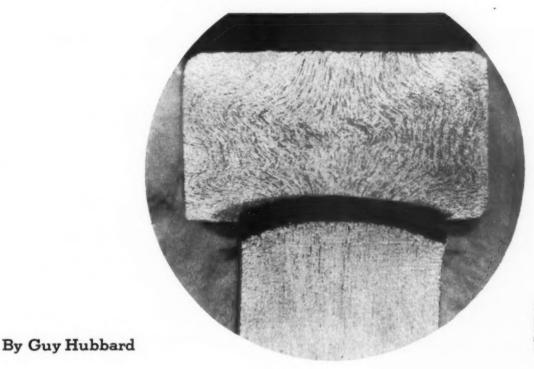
Shaved to sharp corner under head, this heat-treated cold upset screw failed in tension. 10X mag. of etched sections, shown full size
